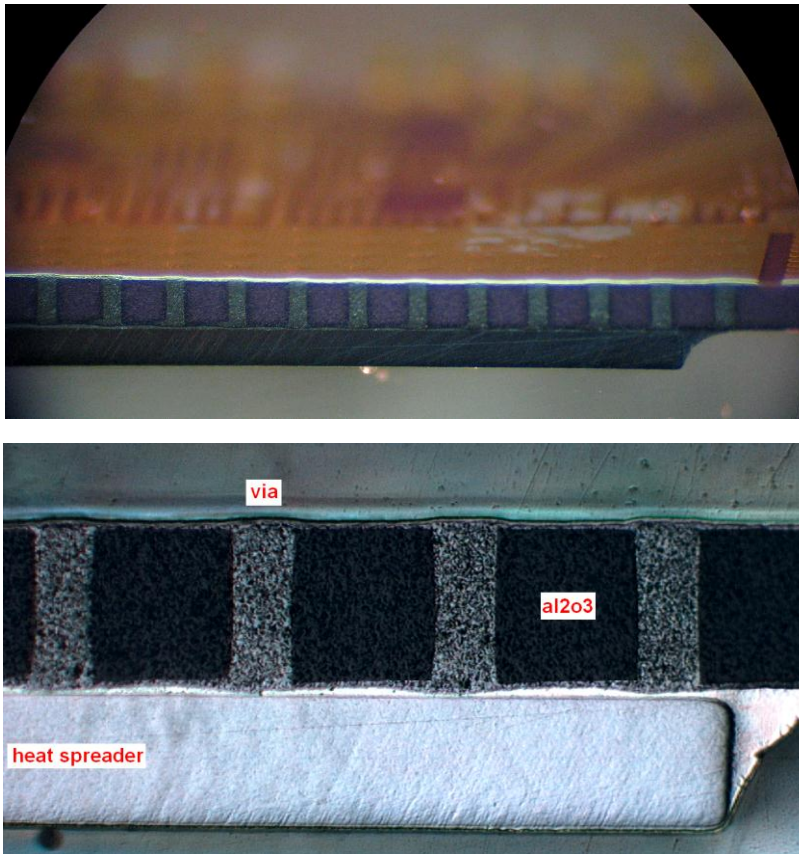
T/R Module Package Courtesy of EADS Astrium [1]
